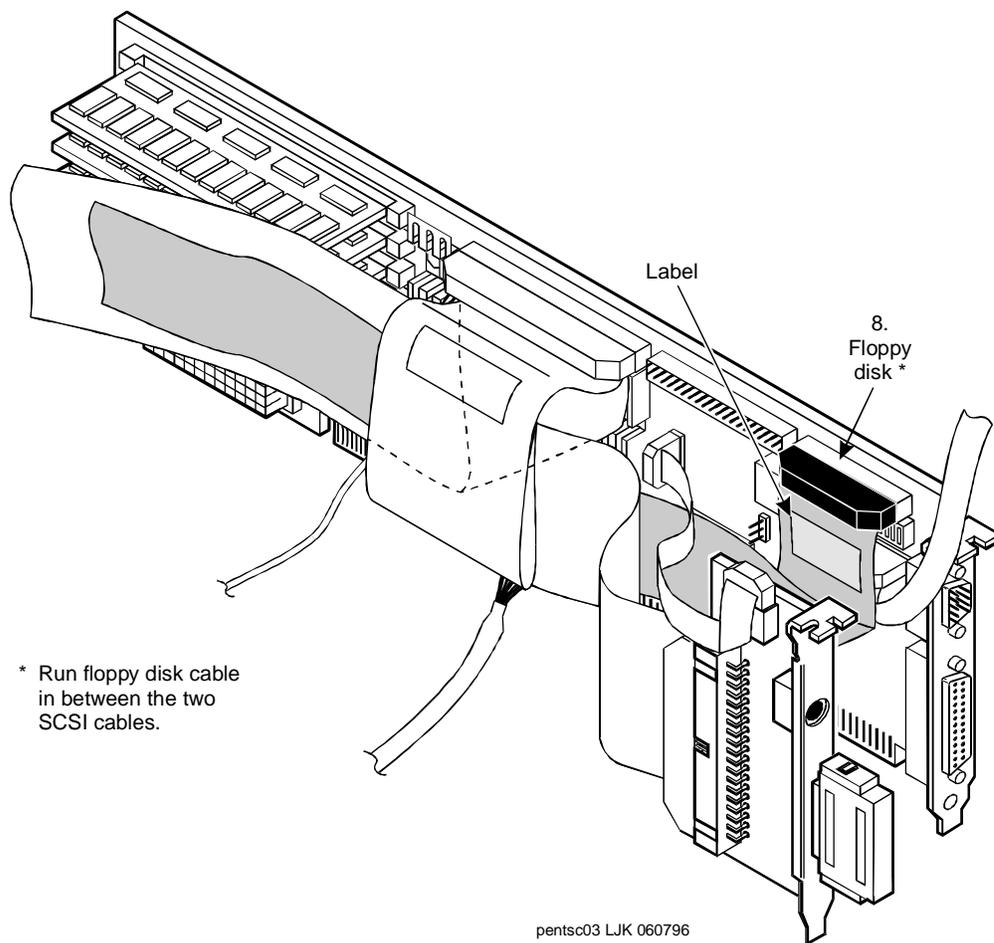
Attaching Cables to the P575/CPU Circuit Card - Part 3
